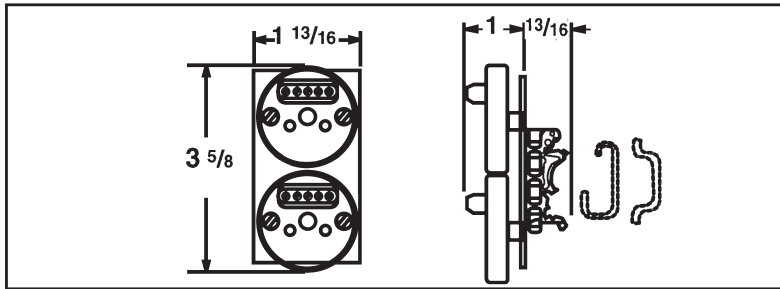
TX 90-DIN DIN Rail Mounting Adapter (Dimensions in inches)
